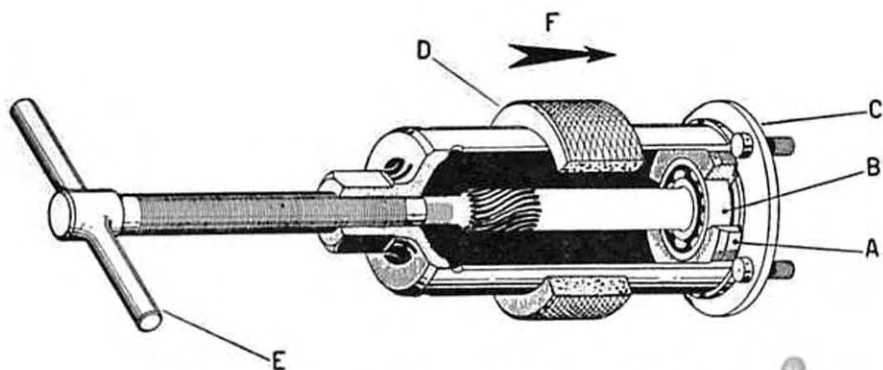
Removing Ball Bearing from Front Wheel Axle.
